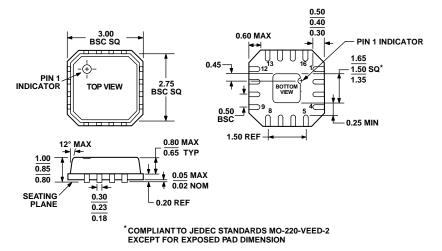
16-Lead Lead Frame Chip Scale Package [LFCSP] (CP-16) Dimensions shown in millimeters
